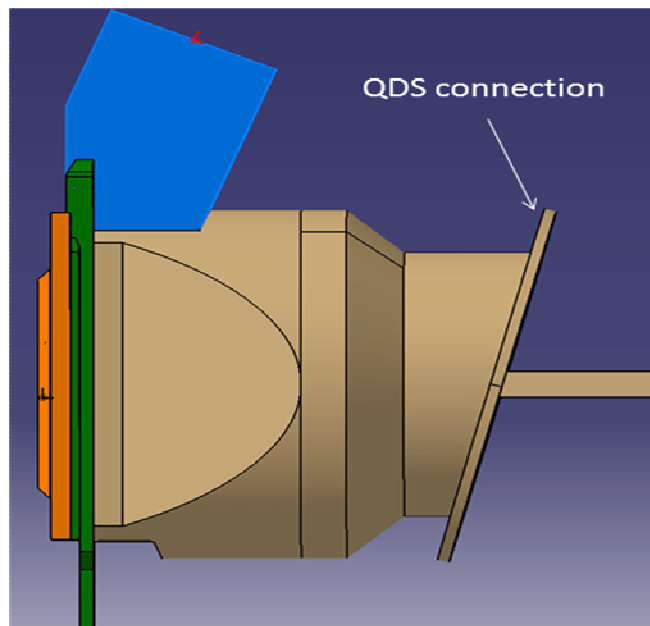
Beam connection (solution with QDS and inclined flanges)
